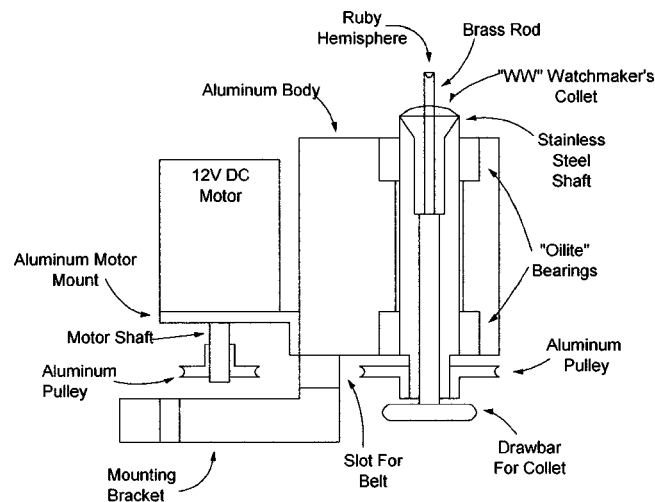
Schematic drawing detailing the components of the powered vertical spindle.
